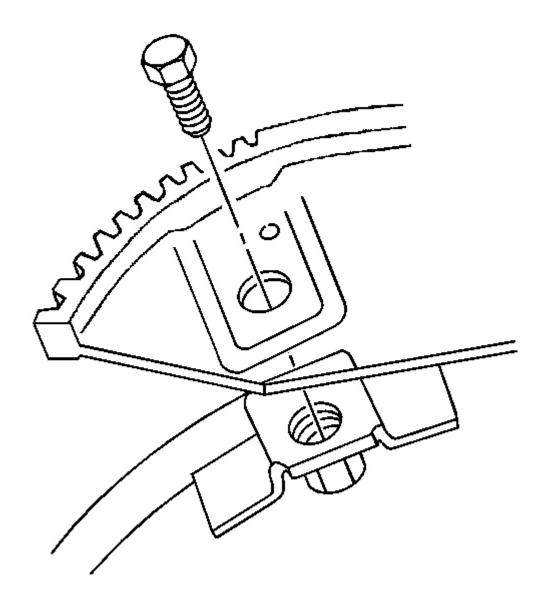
Flywheel-To-Torque Converter Bolts Courtesy of GENERAL MOTORS CORP.
